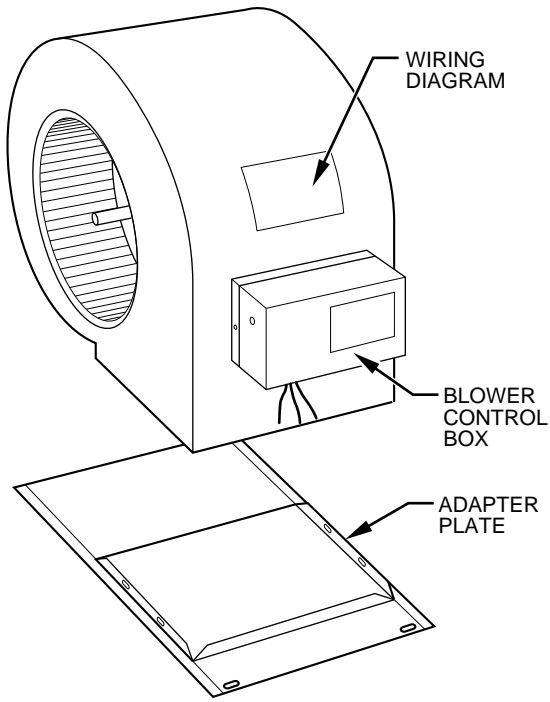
Attaching KMABA05013TE or KMABA06014TE Blower to 3400/3400A Adapter Plate
